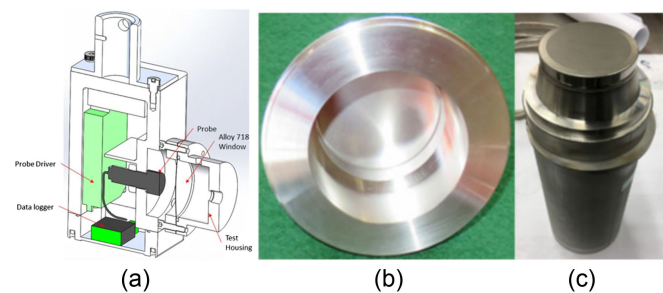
(a) Computer-aided program (CAD) drawing of the IPF testing apparatus used to measure beam window deformation under different loading conditions. (b) IPF beam window and weld flange and (c) full beam window assembly [49].
